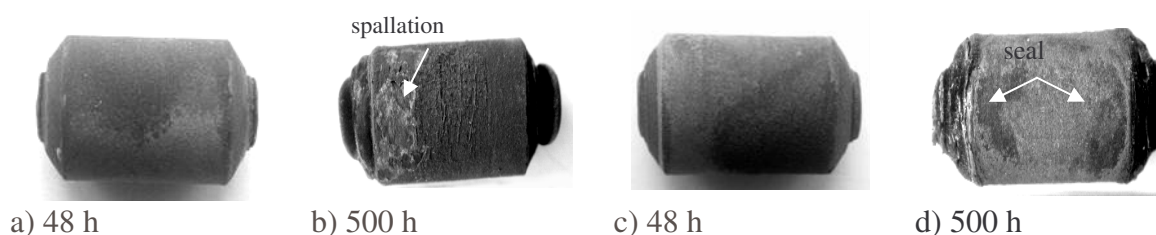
The images of surfaces of HVOF sprayed coatings a-b) without seal and c-d) with seal
